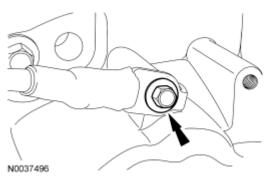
Locating Ground Wire Bolt Courtesy of FORD MOTOR CO.
